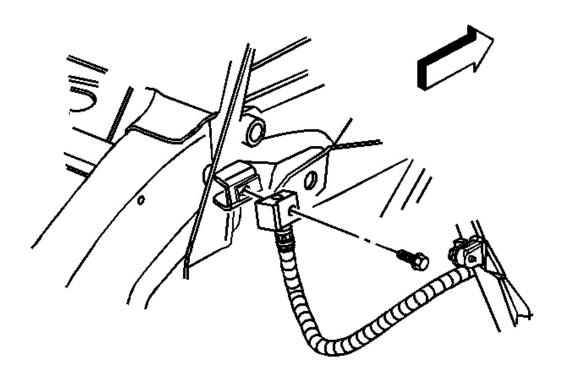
Brake Hose Retaining Bolt Removed From Frame Courtesy of GENERAL MOTORS CORP.
